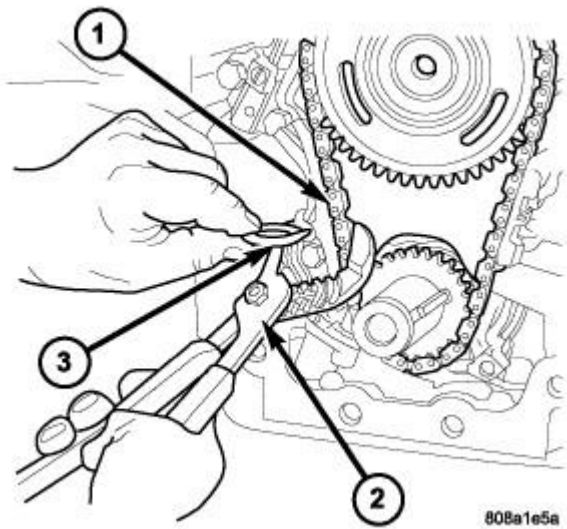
Collapsing And Pinning Primary Chain Tensioner
